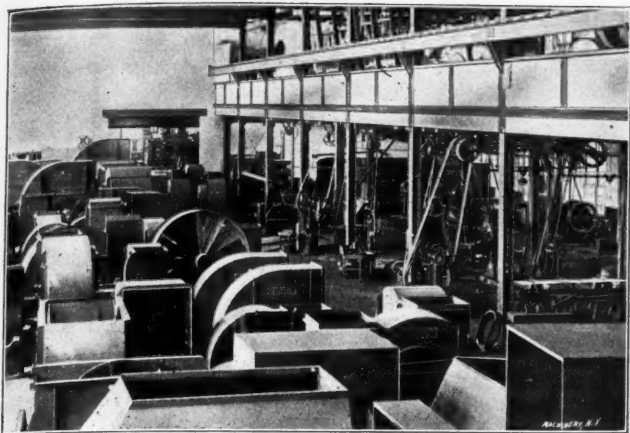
Erecting Floor for Fans and Heater Jackets.
